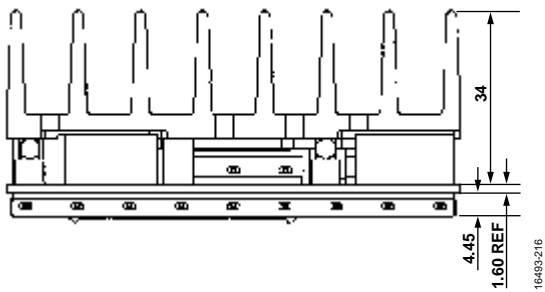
Thermal Gasket and Heatsink Mechanical Drawing Side View
